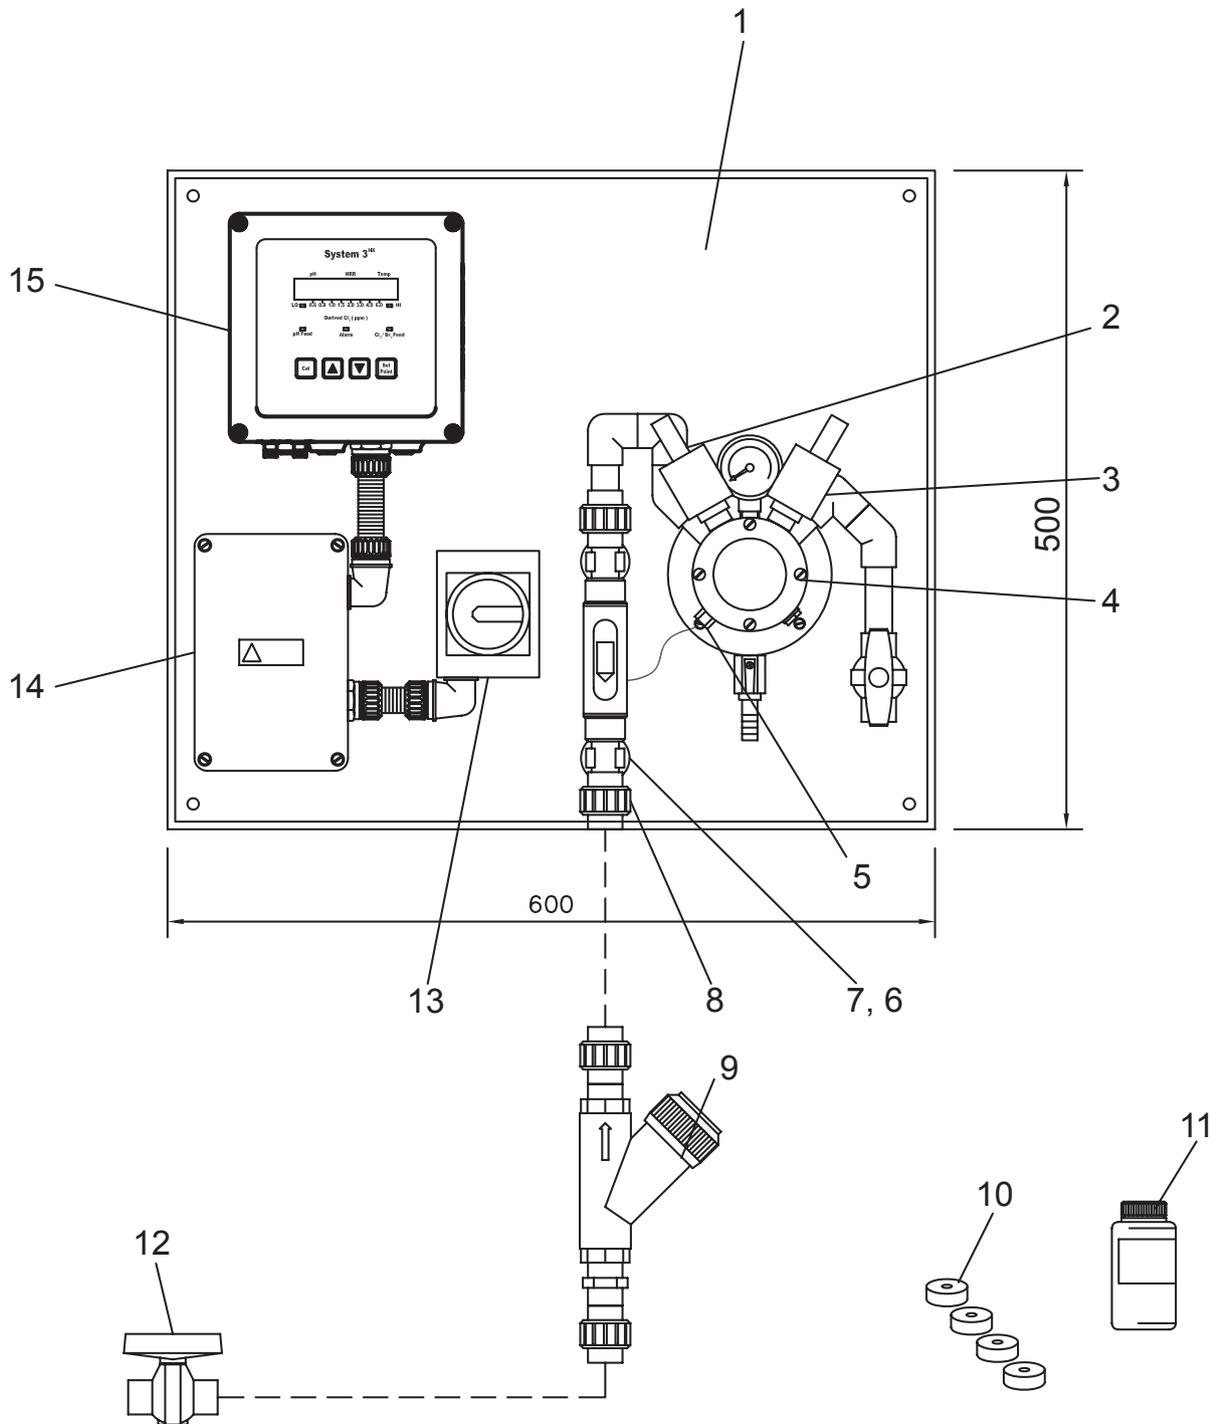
Layout/Overall Dimensions System 3<sup>NX</sup> Board Mount (AAB8979)
